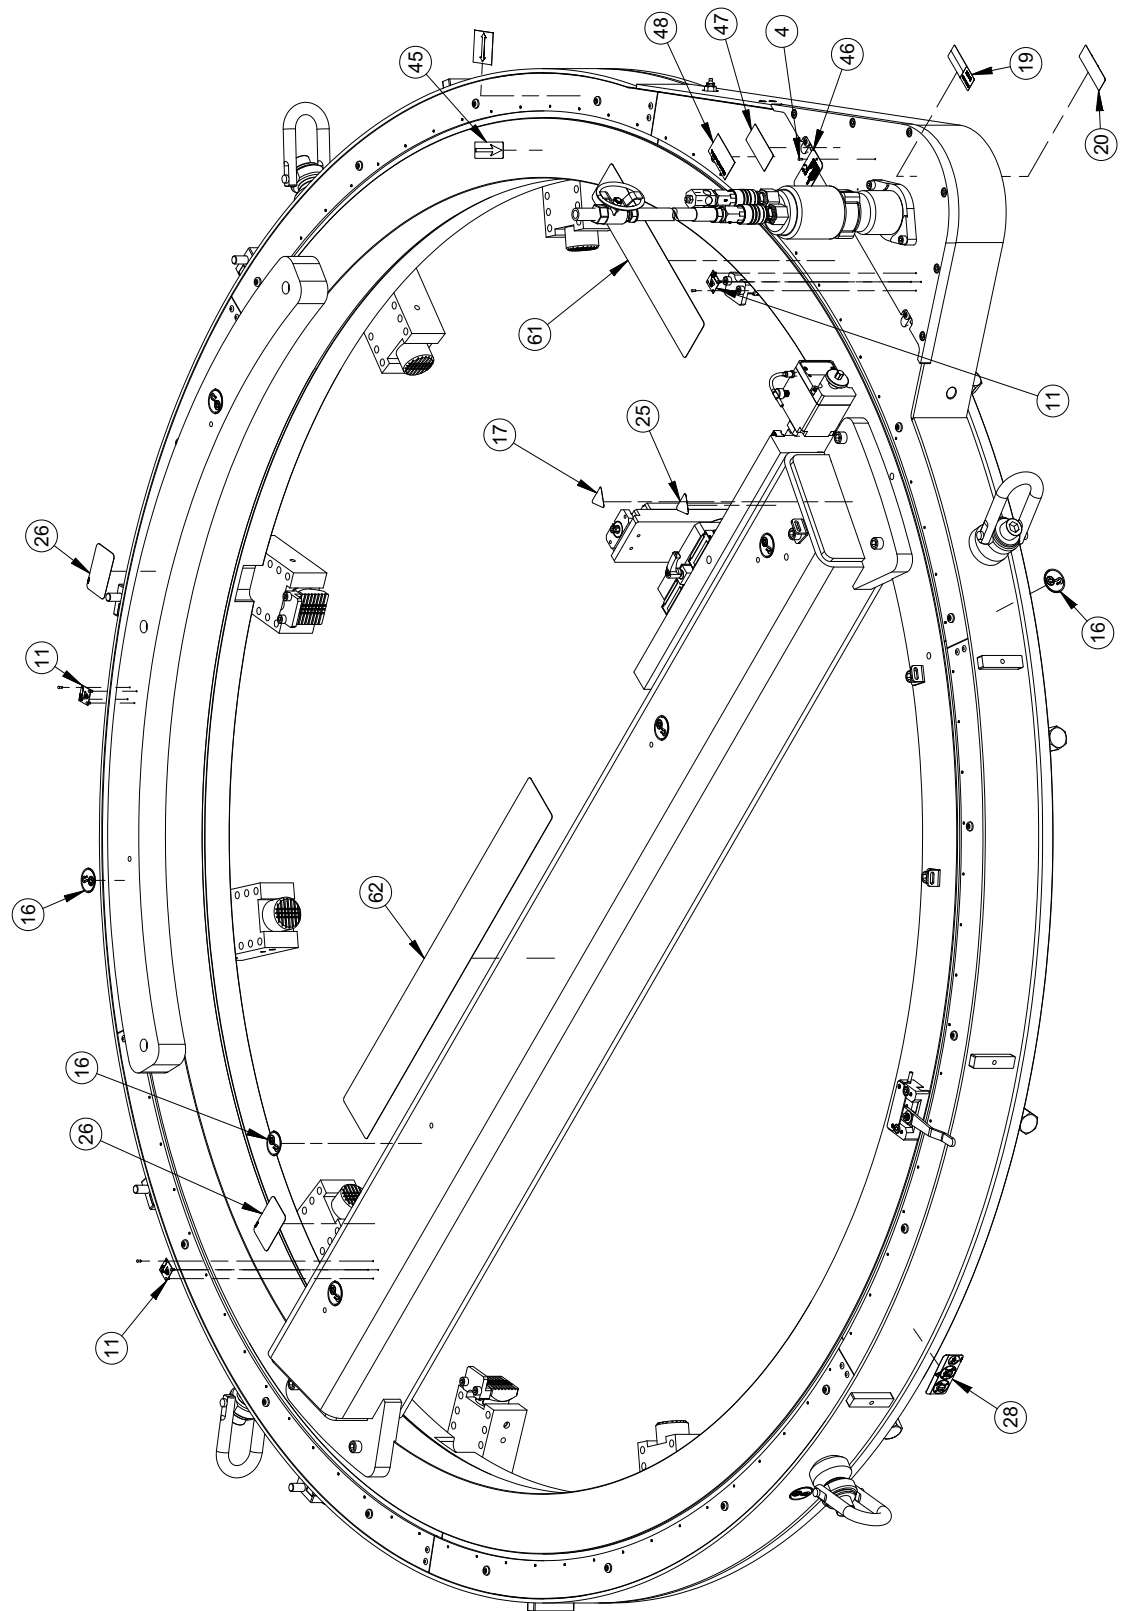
ODF80 SPEED FACER LABEL LOCATIONS (P/N 94770)
